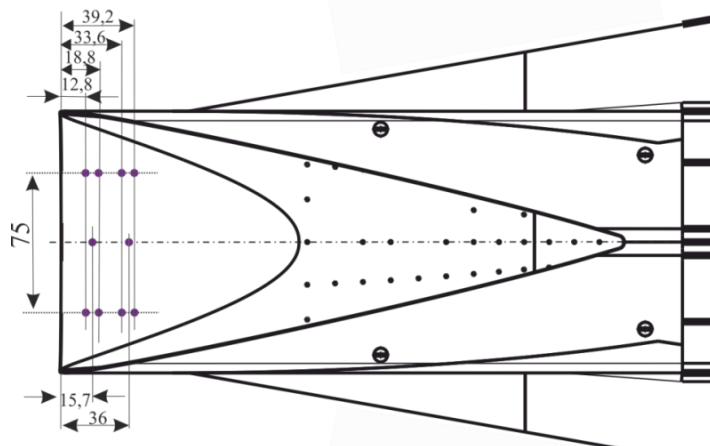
Positions of screw heads installed on the intake surface (variants from 2 to 4)
